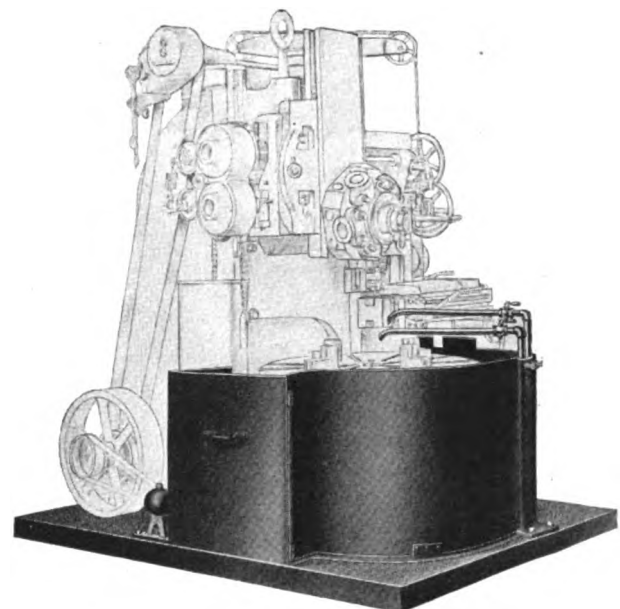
A Cutting Lubricant System for the Vertical Turret Lathe and Maxi-Mill
